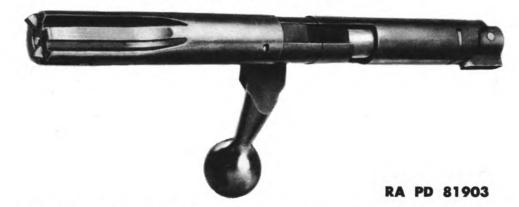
Bolt Assembly of Stevens Rifle, Cal. .22, Model 416-2
